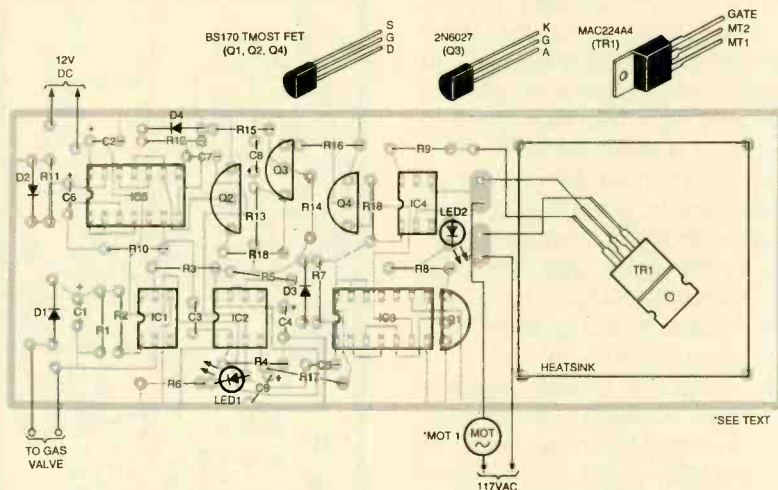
Once you've gathered all the parts listed in the Parts List, assemble the printed-circuit board guided by the parts-placement diagram shown here.
